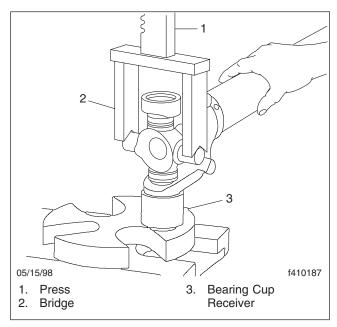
, Removing Bearing Cups from an RPL U-Joint
